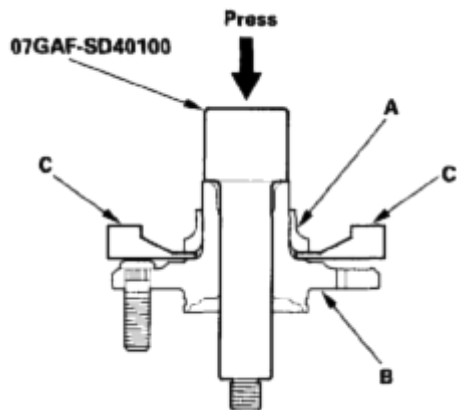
Pressing Wheel Bearing Inner Race Out Of Hub Using Hub Dis/Assembly Tool
